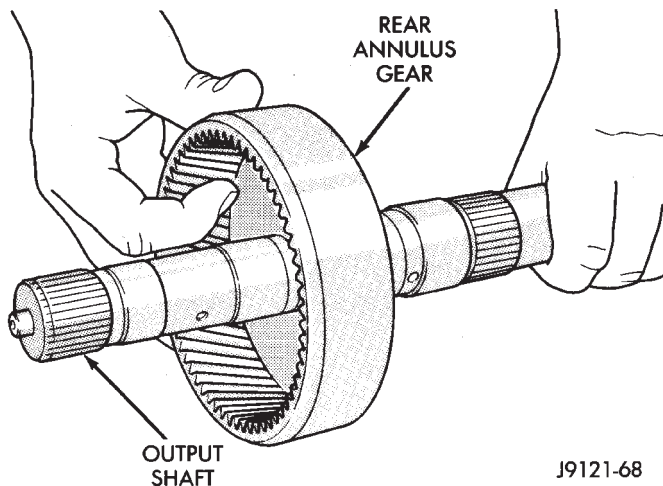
Installing Rear Annulus Gear On Intermediate Shaft
